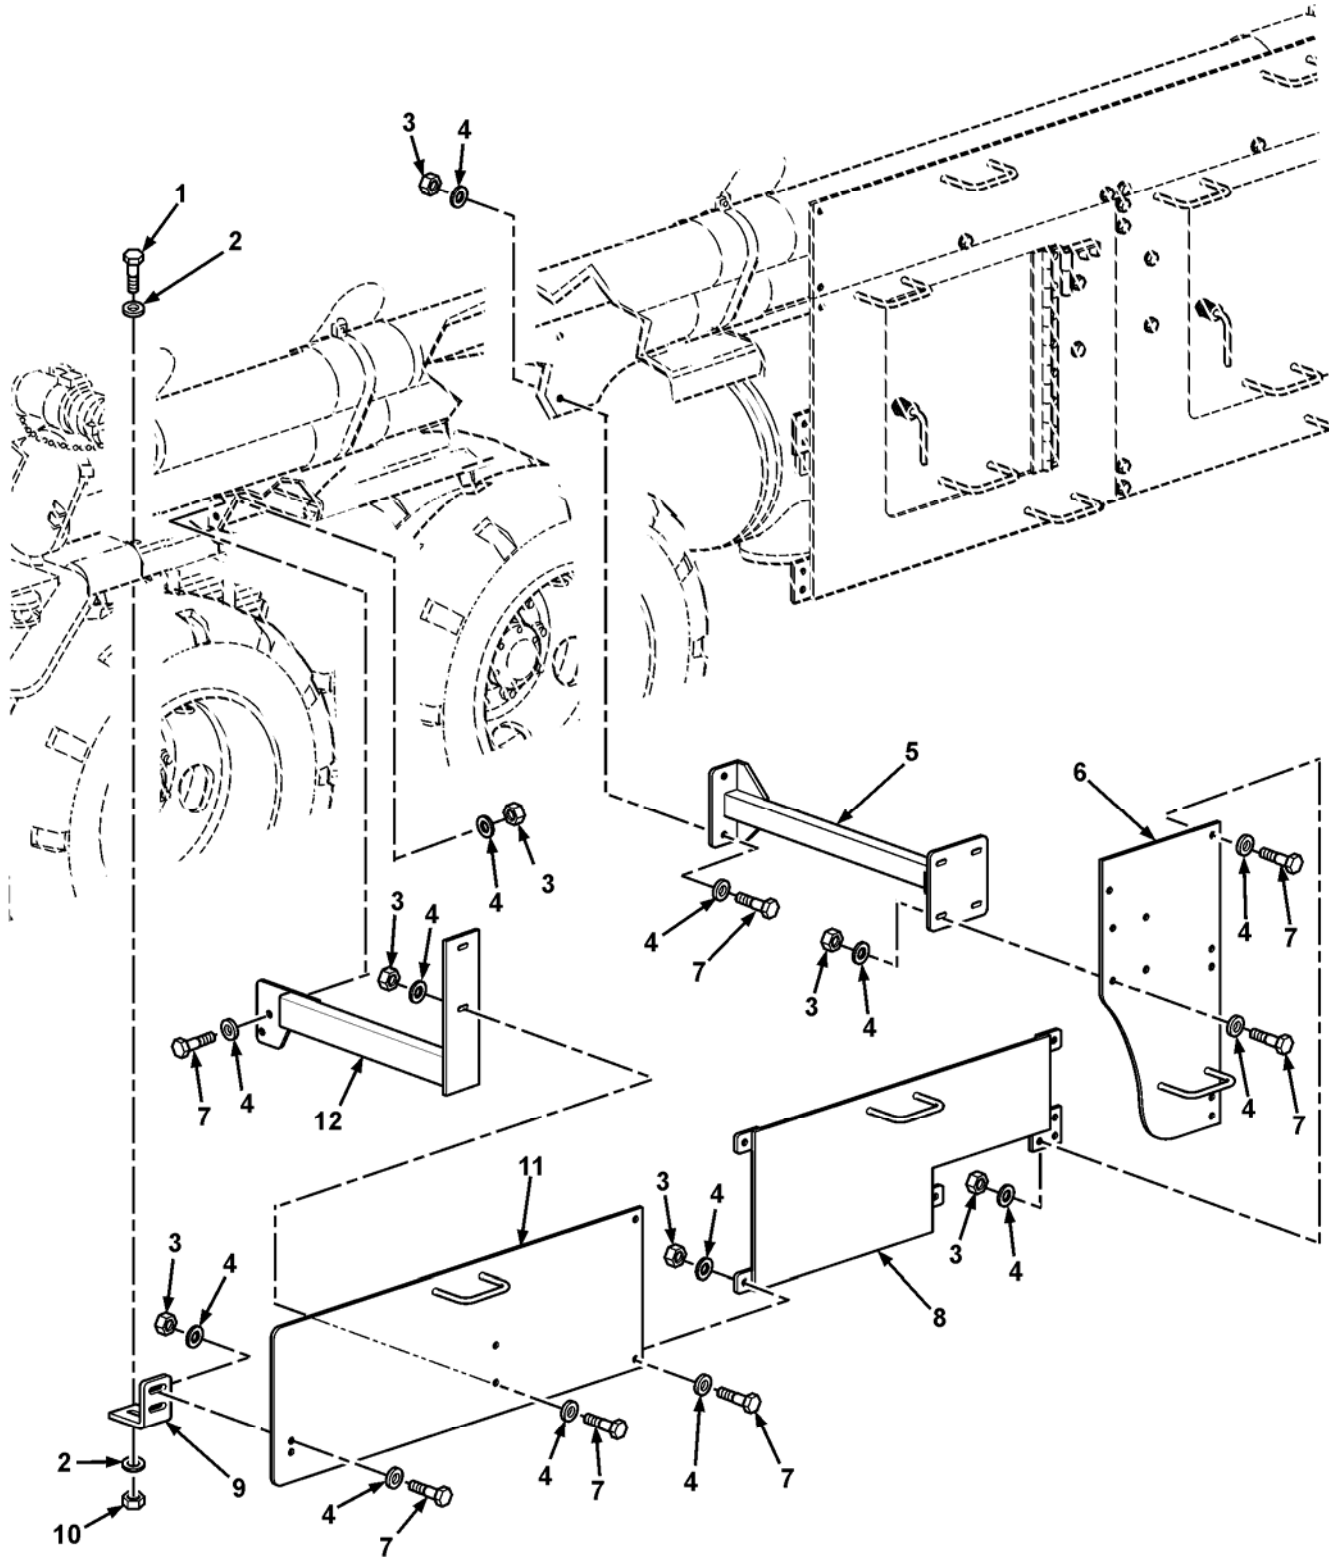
Curbside Center Armor Plate Door Assemblies, Panels and Mounting Bracket
